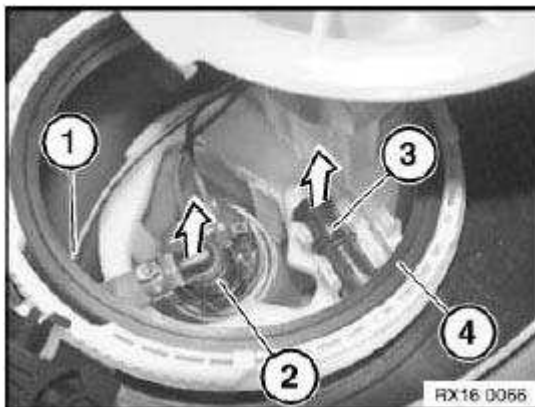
Cable, Lines, Plug Connection And Removal Directions
